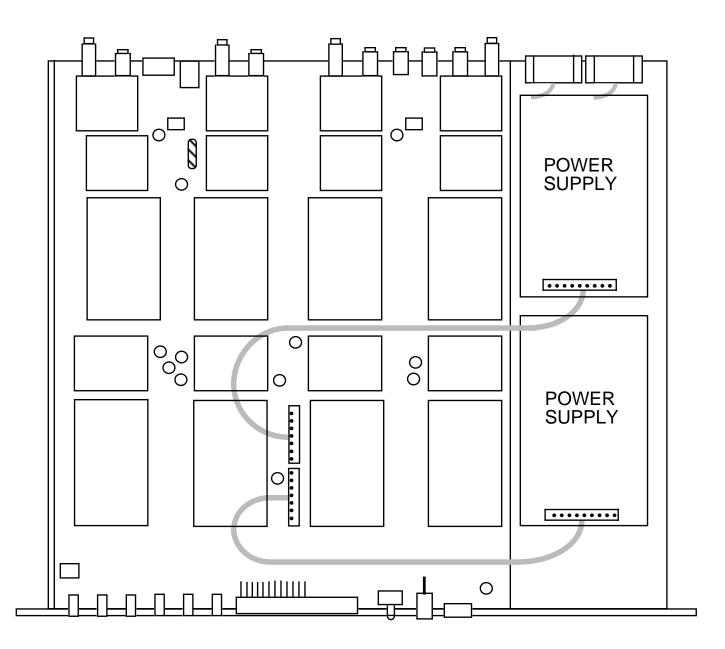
2416-x02 Mechanical Assembly (Shown, Model 2416-402 - Four Channel)
